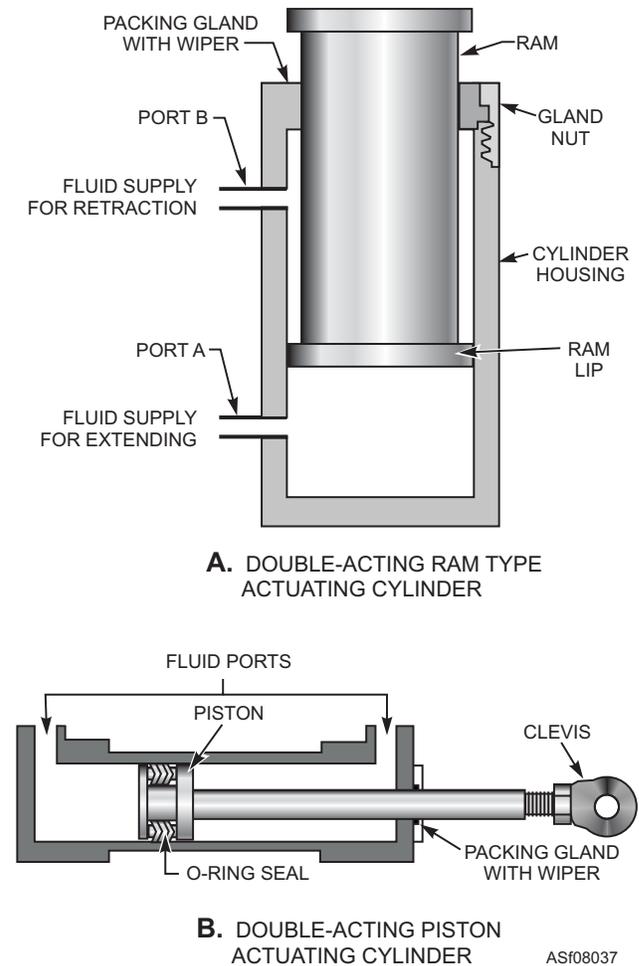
Typical cross-sectional view of a double-acting actuating cylinder.
